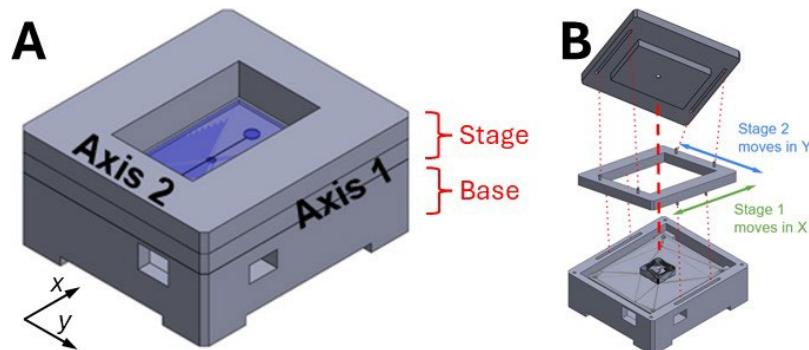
3D printed case. (A) The case consisted of the base and the two-layered stage. (B) Exploded view.
